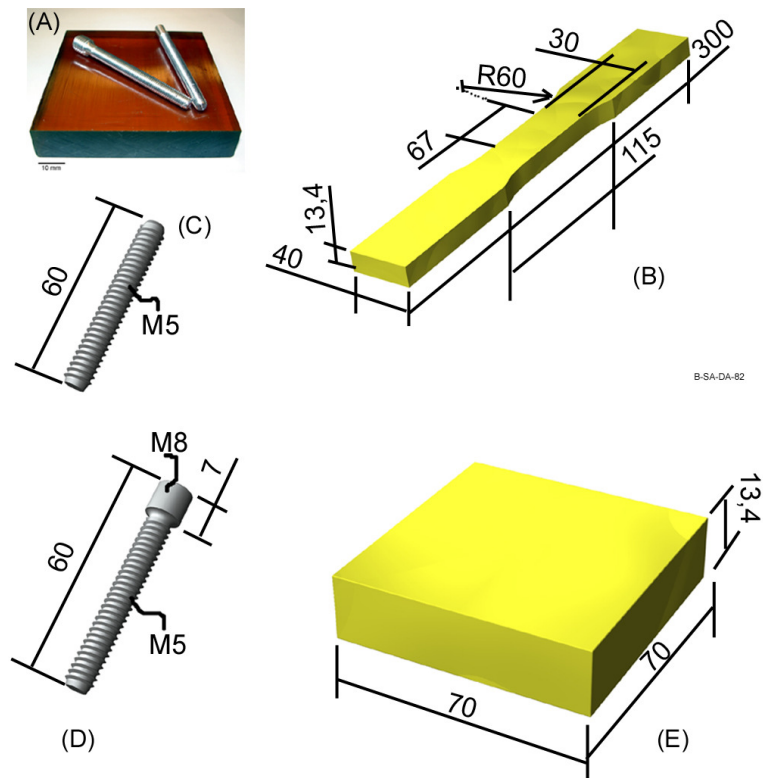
Tensile specimens used in this work. A) photo of the PEI-base plate and Al 2024 for T-pull tensile testing. B) DIN 53455 type-3 flat tensile specimen. C) M5-rivets tensile test specimen adapted from DIN EN ISO 898. D) Rivet for T-pull specimen based on DIN EN 10002. E) Polymer plate for T-pull specimens.
